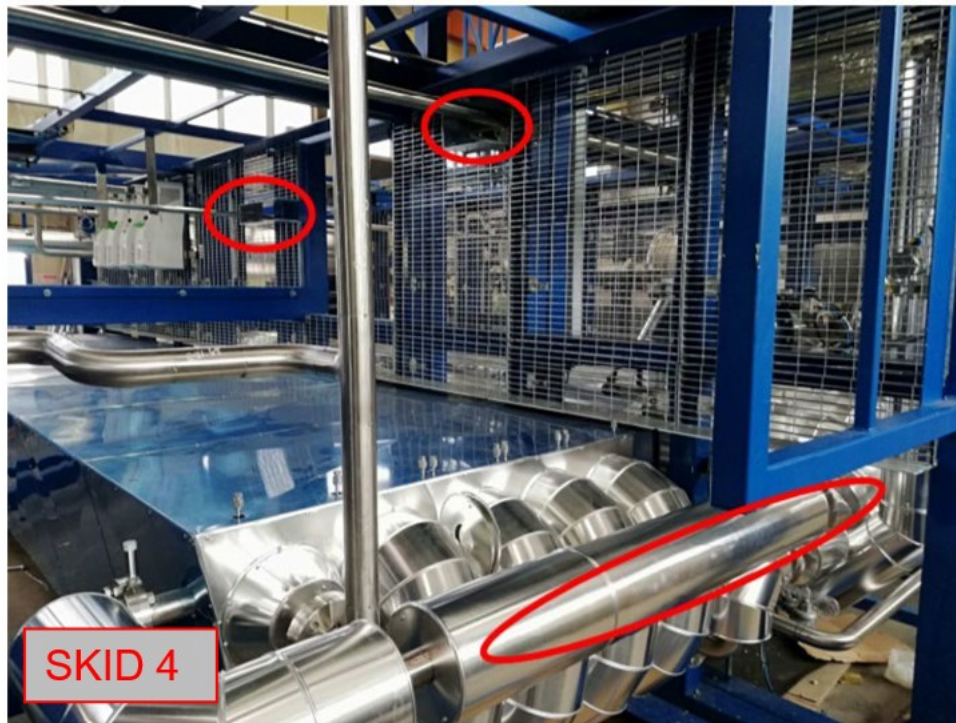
Blind flanges of skid 4 to be removed before the installation of skid 4 on skid 3.
